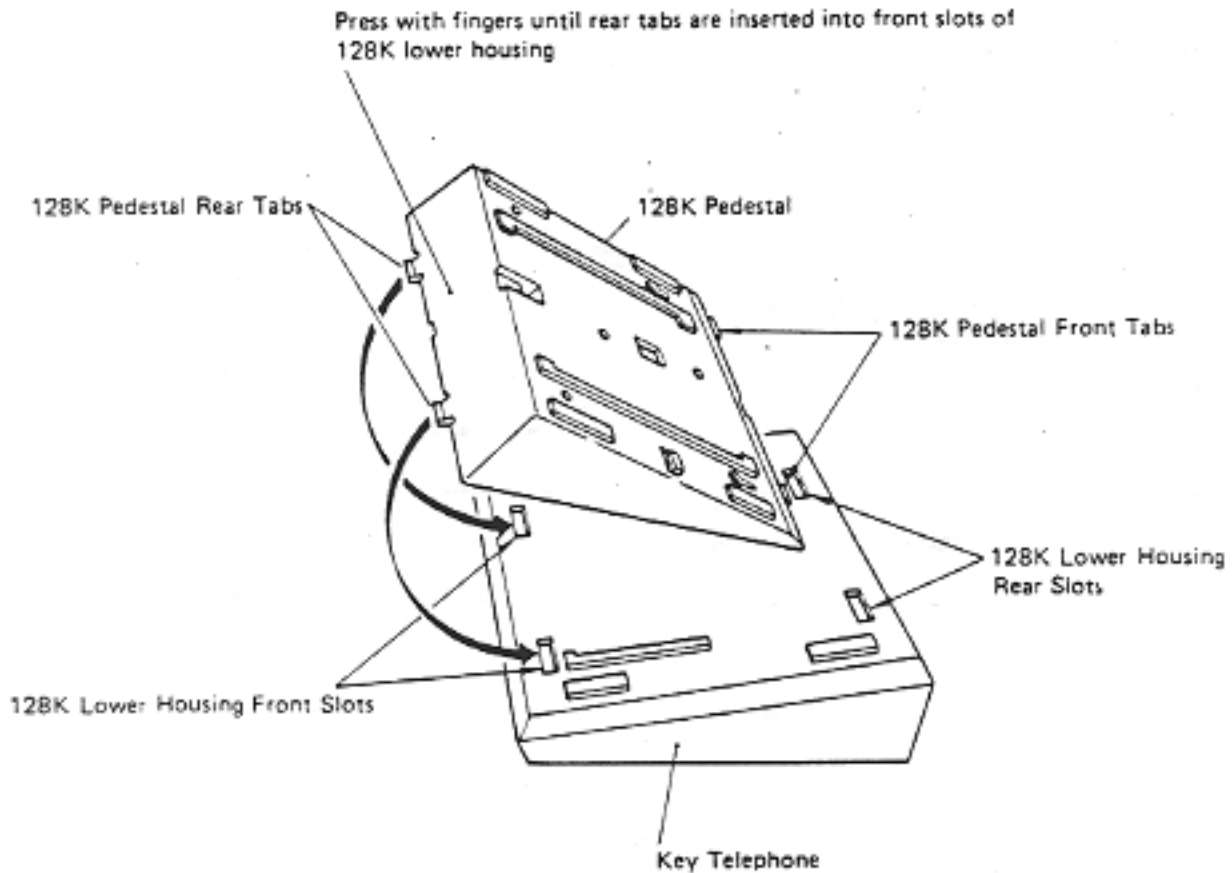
(4)(b) Mounting 128K Pedestal on 128K Lower Housing
